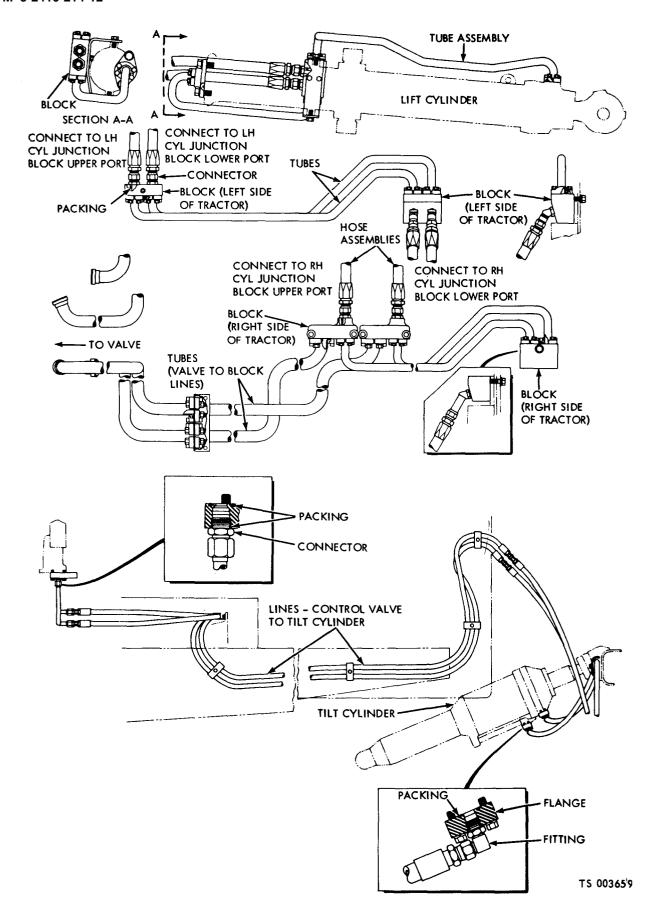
Hydraulic system hoses, lines. and fittings, removal and installation. (sheet 2 of 4).
